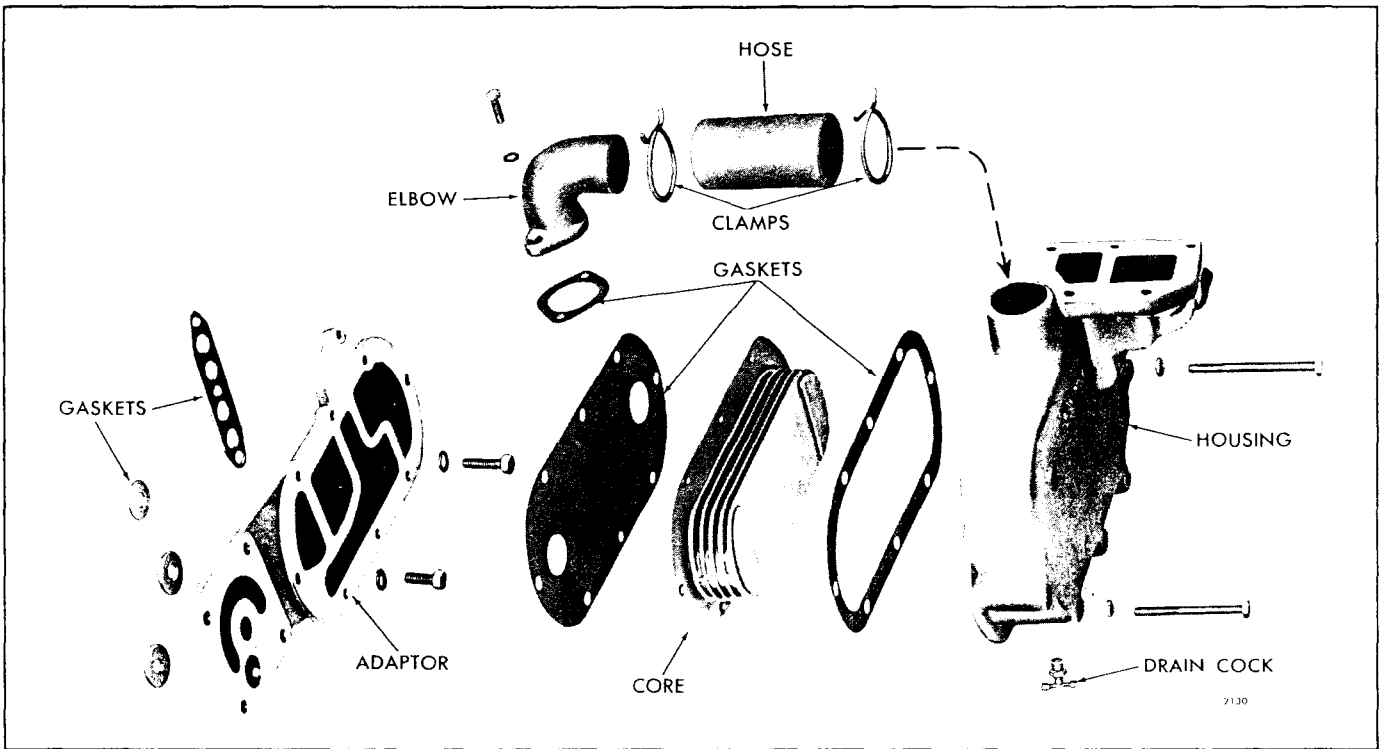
Oil Cooler Details and Relative Location of Parts (In-Line Engine)
